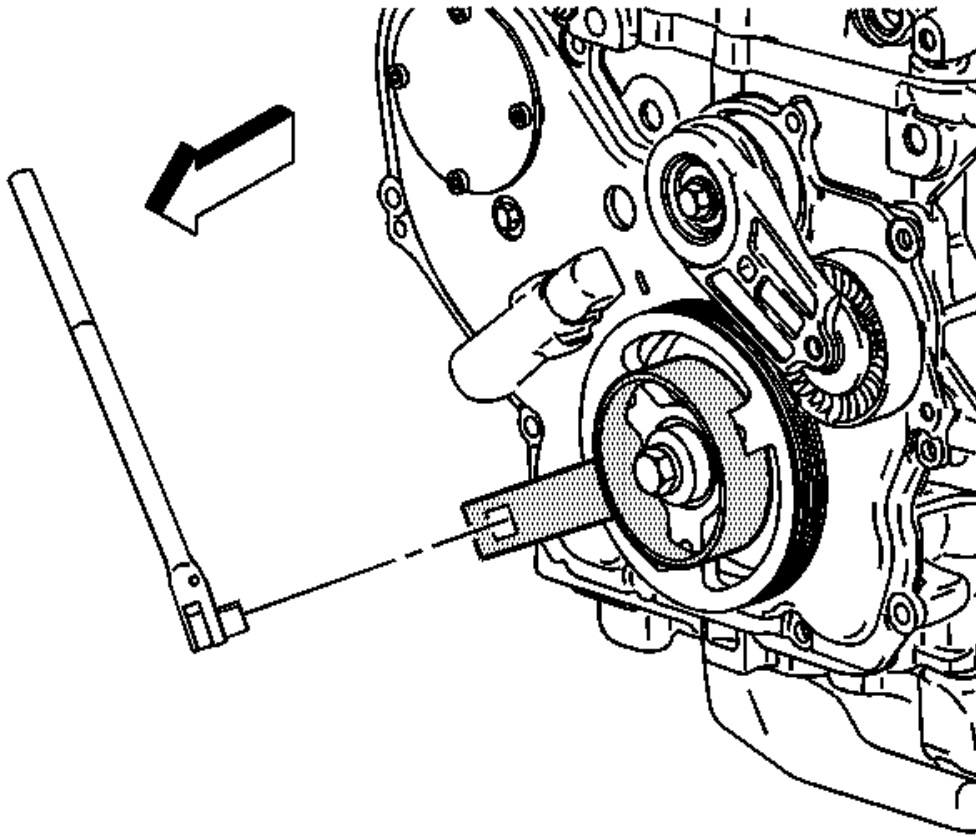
View Of Harmonic Balancer Holder J38122-A
